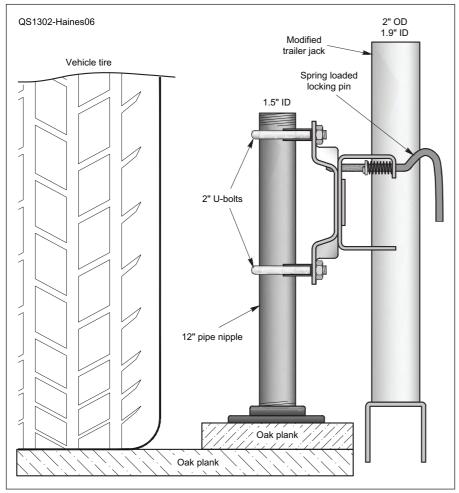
This drawing shows the major elements of the jack, with the mount in place under a front tire.
